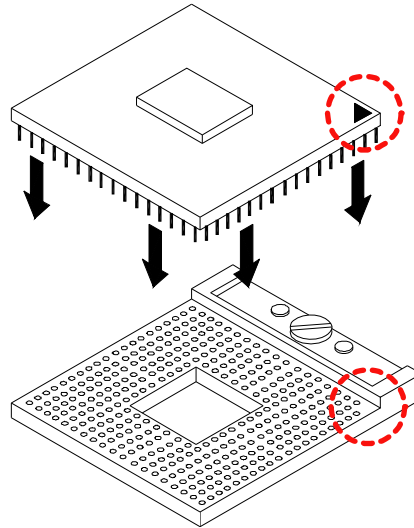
CPU alignment in Micro-FCPGA Socket (Socket P)
